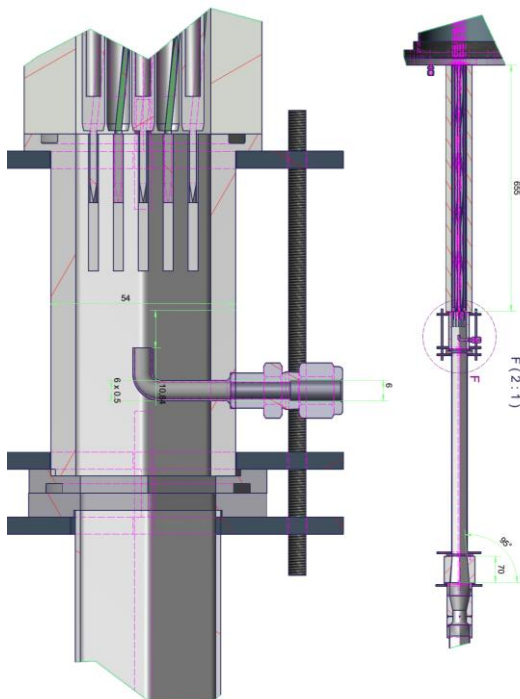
Detailed drawing of the foot part of the test section with the particle insertion (left) and the optical parts of the MYRTE test section (right).
